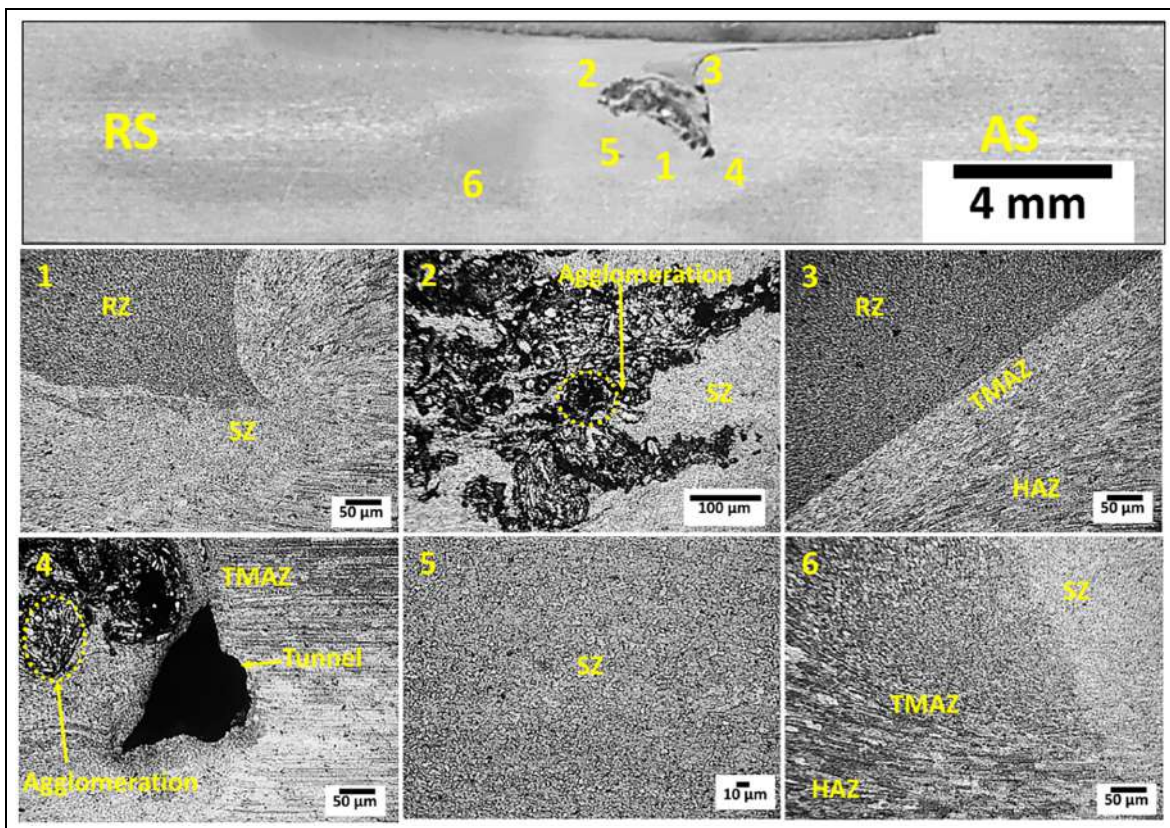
Macroscopic image of sample SP5 and several locations of the welding zone.
